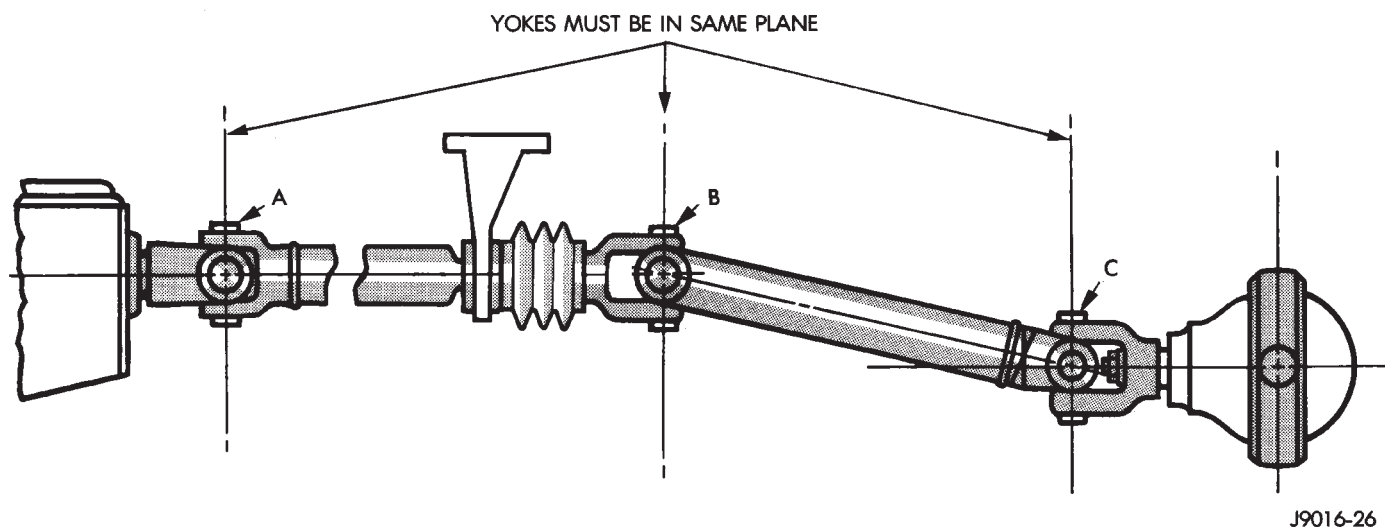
Universal Joint Angle—Two-Piece Shaft
